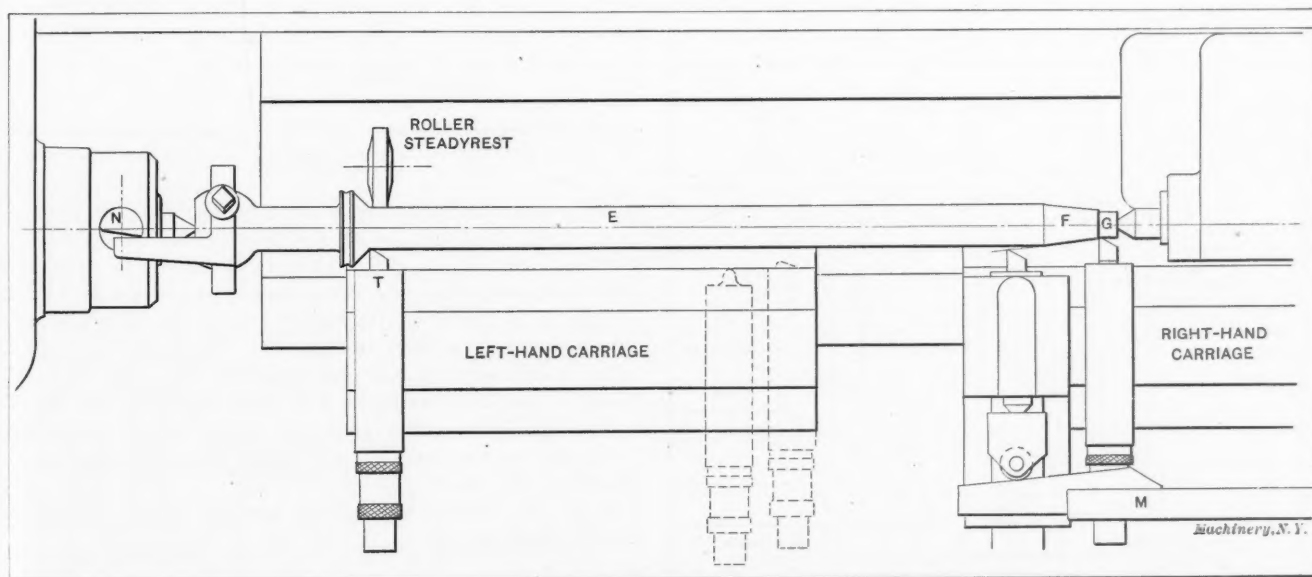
Tool Arrangement for Second Operation on Propeller Shafts
